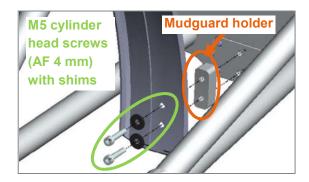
M5 cylinder head screws for fastening the mudguard on the mudguard holder and frame
